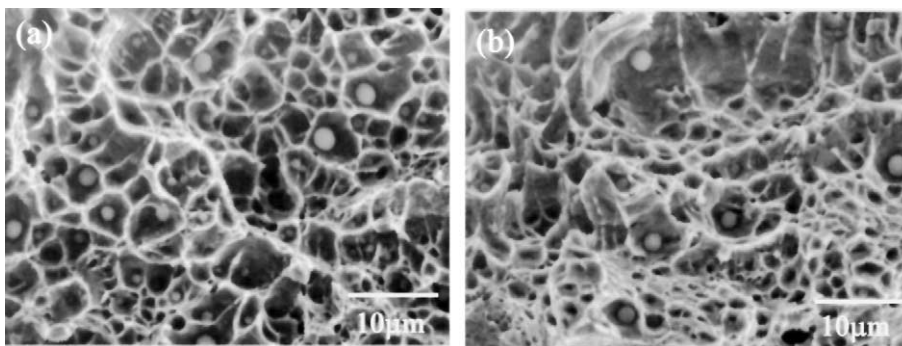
Initial ductile regions on the fracture surfaces of the tested PCVN specimens of the WF-233 and 72W welds tested at -75°C : (a) WF-233 weld and (b) 72W weld.
